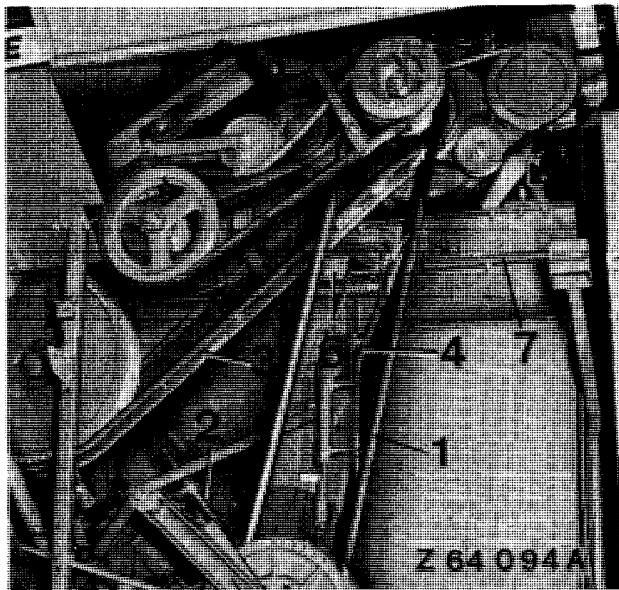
Preparing to Remove Engine (Combines with Variable Ground Speed Drive)
